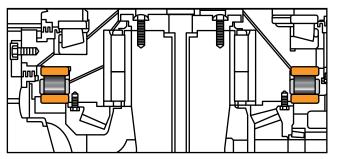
Typical mounting arrangement of thrust cylindrical roller bearing in crusher application.
